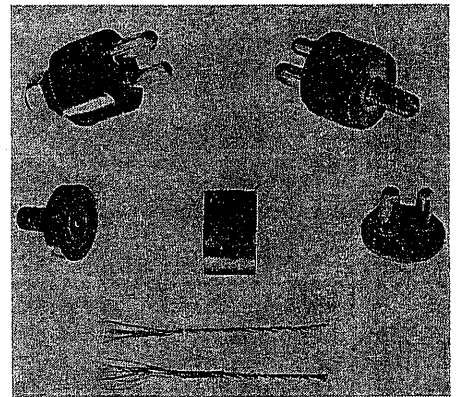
An exploded view of the transistor, with two completed units above. Araldite type D is used to fill the case.
